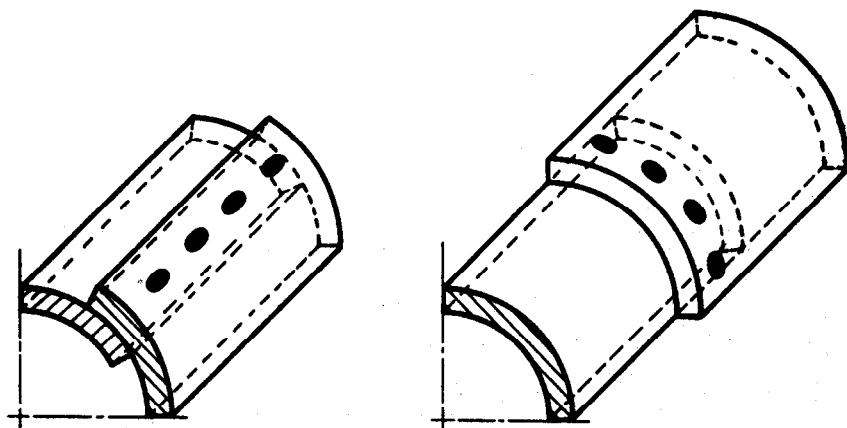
CIRCULAR LAP WELD JOINTS
